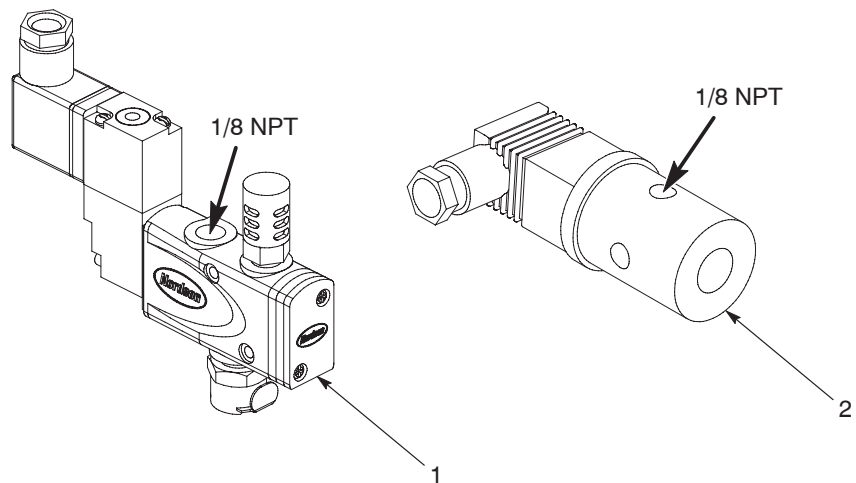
Location of the module-actuating air inlet on solenoid valves
